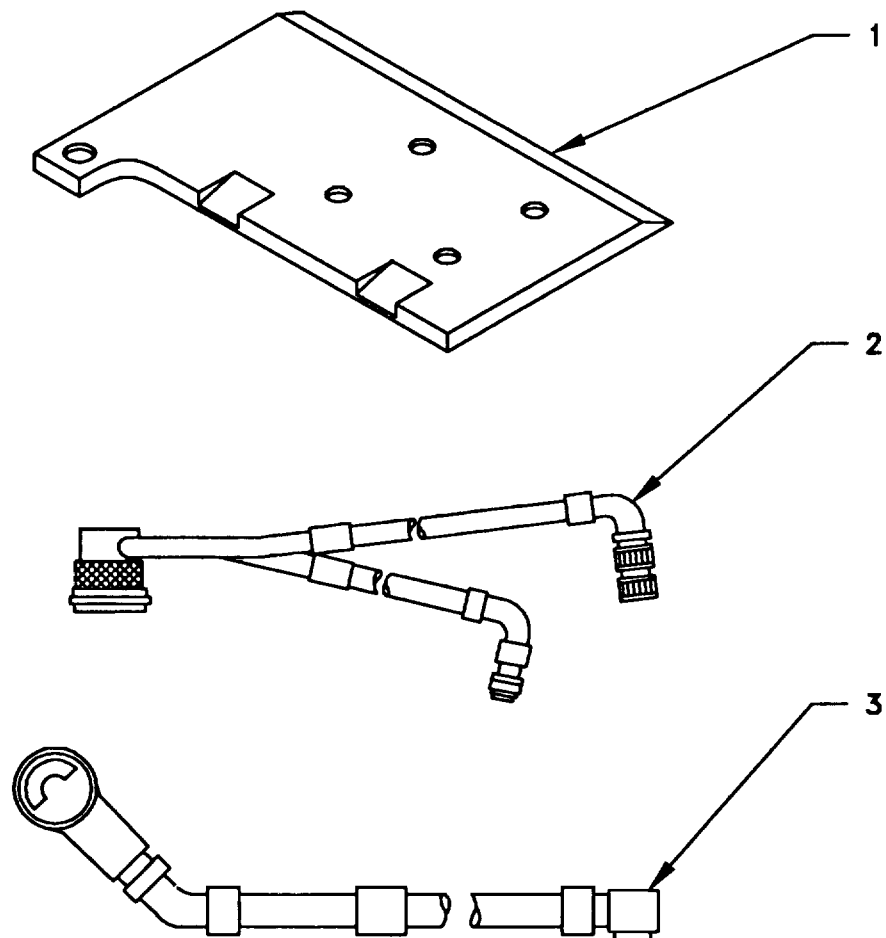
TSEC/KY-57 Illustrated Parts List.
